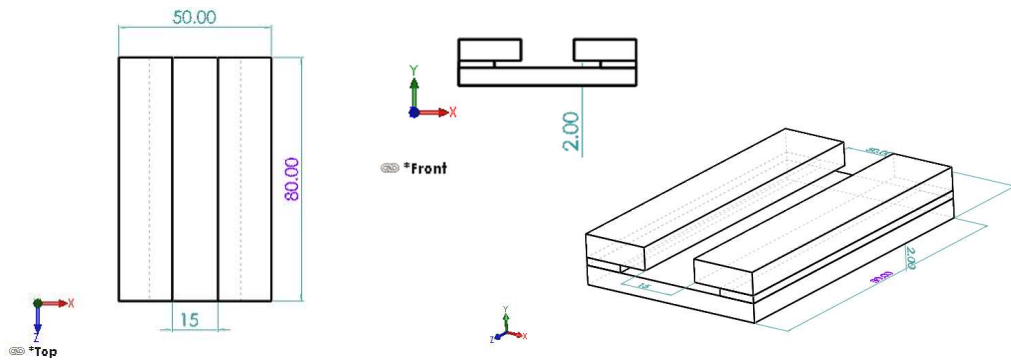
CAD drawing of sample piece mounting bracket for tensile adhesion tests.
